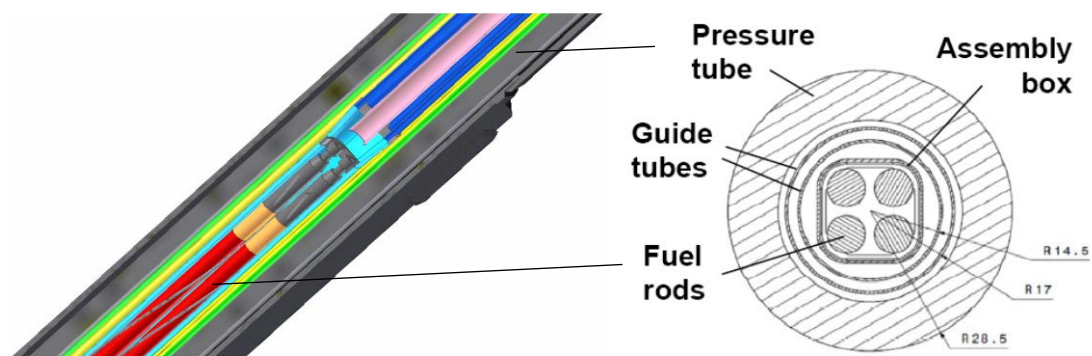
Design details of the test section inside the pressure tube (left) and the cross-section of the test section with the fuel assembly (right).
